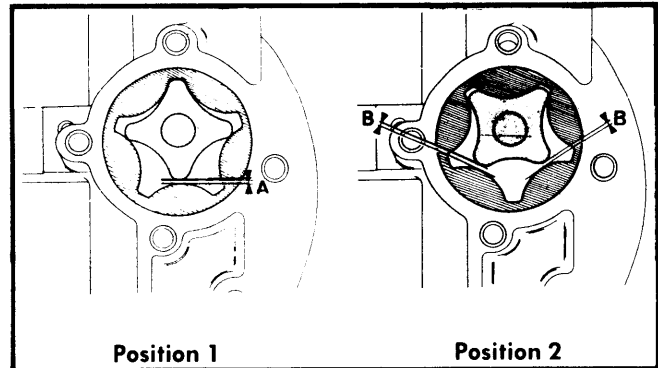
Measurement Points of Oil Pump Rotor Clearance
